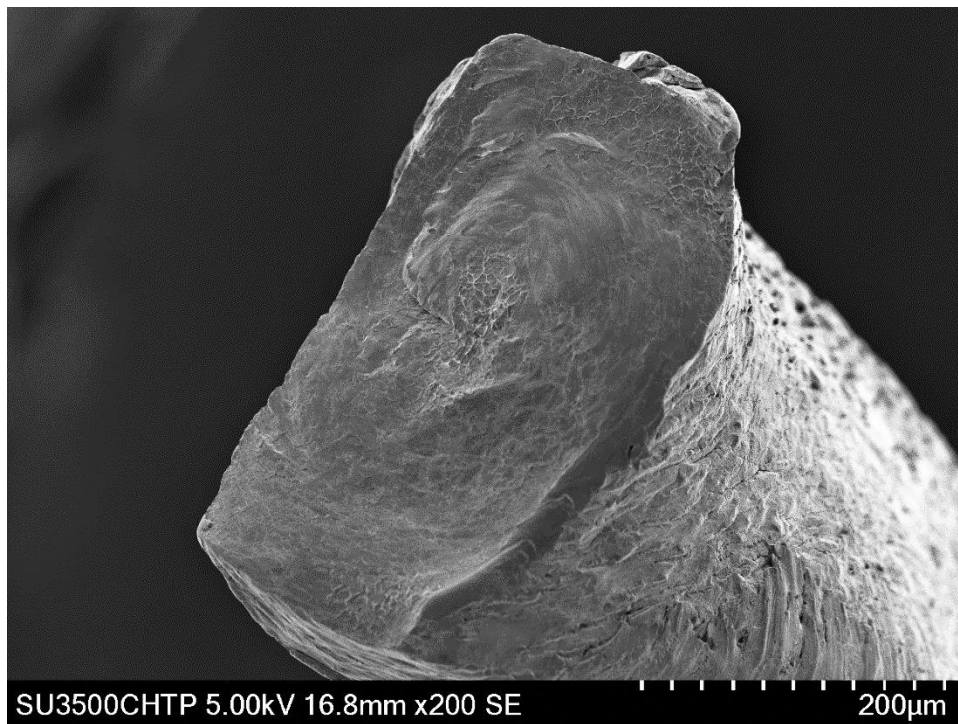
Fractured surface of HyFlex EDM file after pure torsional fracture showing circular abrasion marks, no fatigue striations and a centered area of skewed dimples.
